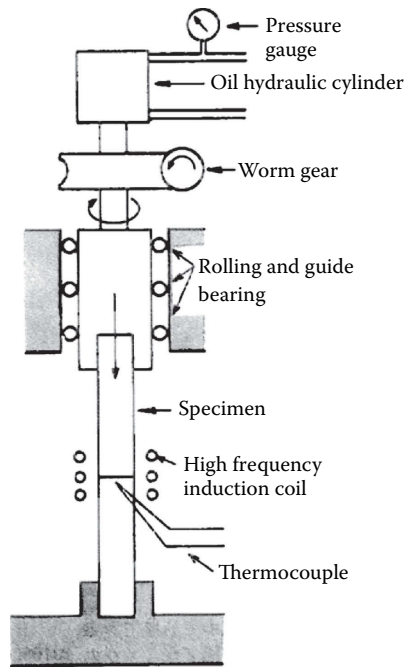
Schematic illustration of twist compression welding equipment
